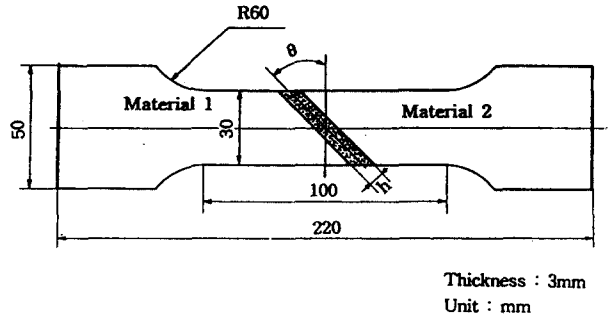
Shapes and dimensions of adhesively bonded joint specimens
